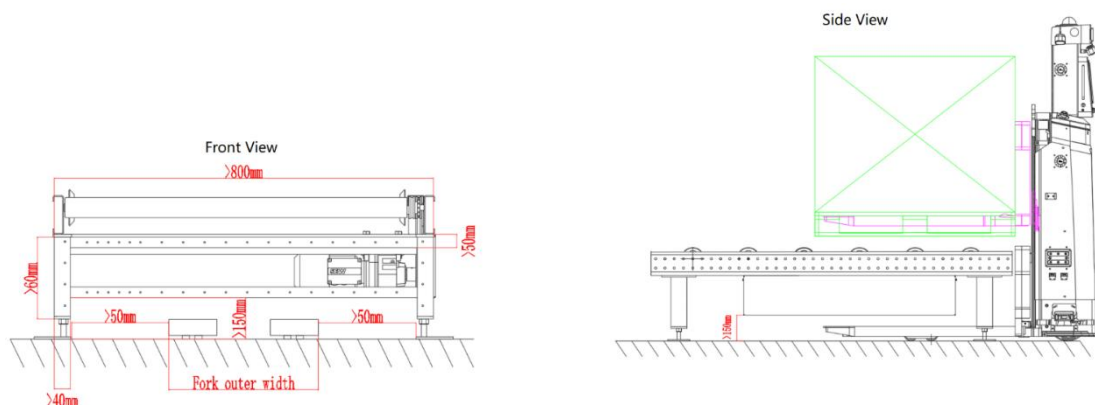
Conveyor front docking with AGV that has supporting legs.
